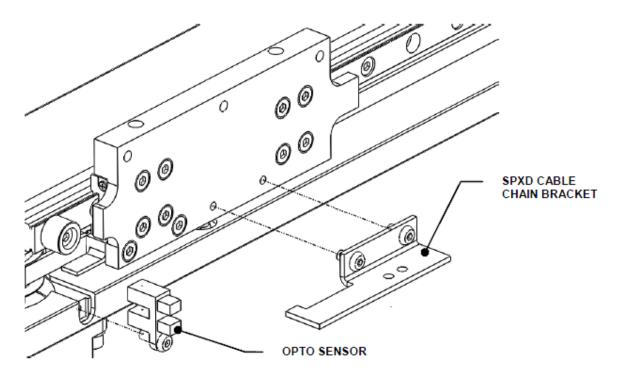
Removing the Optosensor and Chain Cable Bracket
